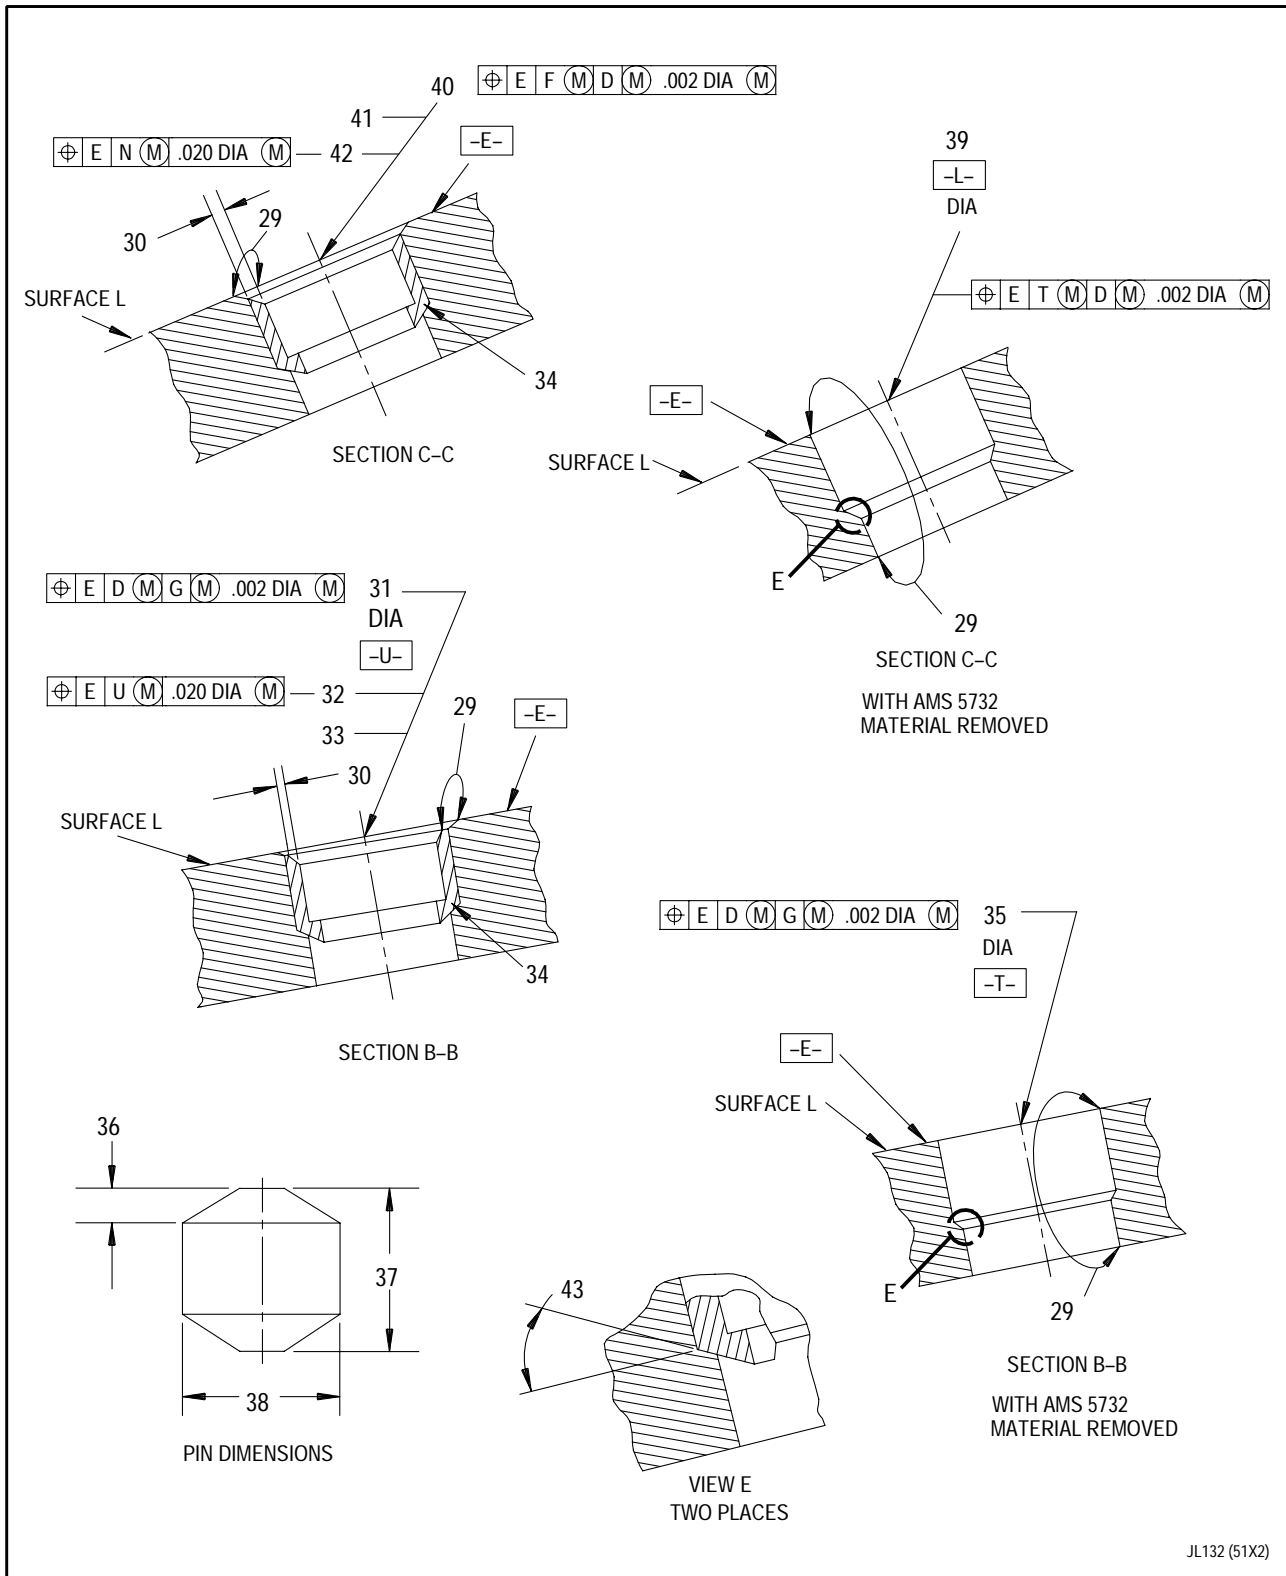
Gearbox (Front) Housing Assembly - Dowel Pin Holes Repair (Sheet 4 of 4)
